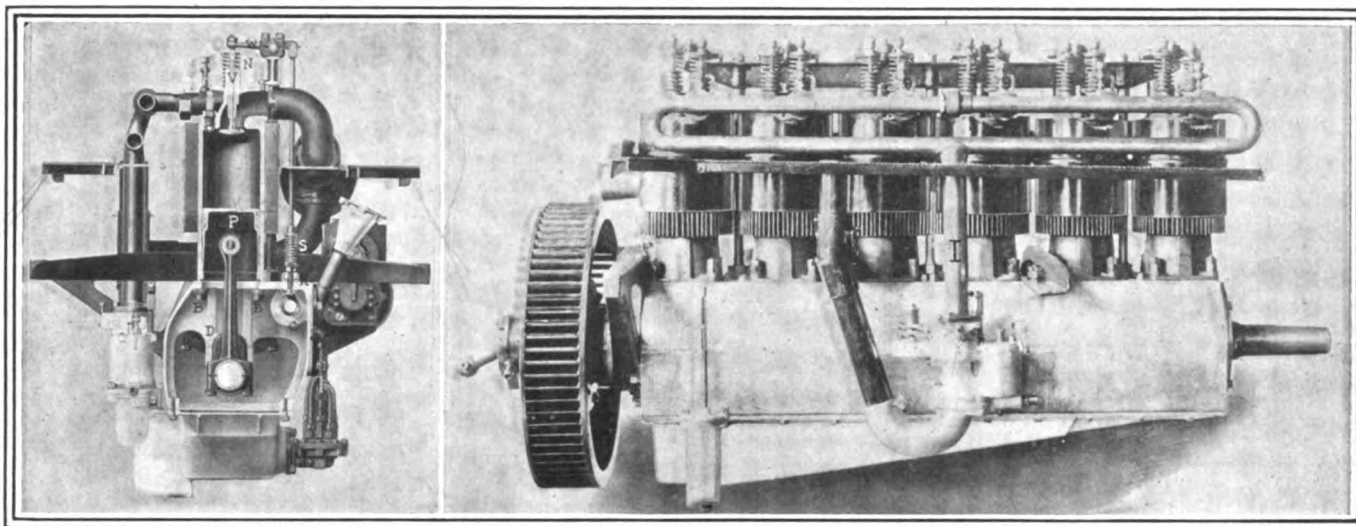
Showing transverse section through motor and a longitudinal view of the intake side.
